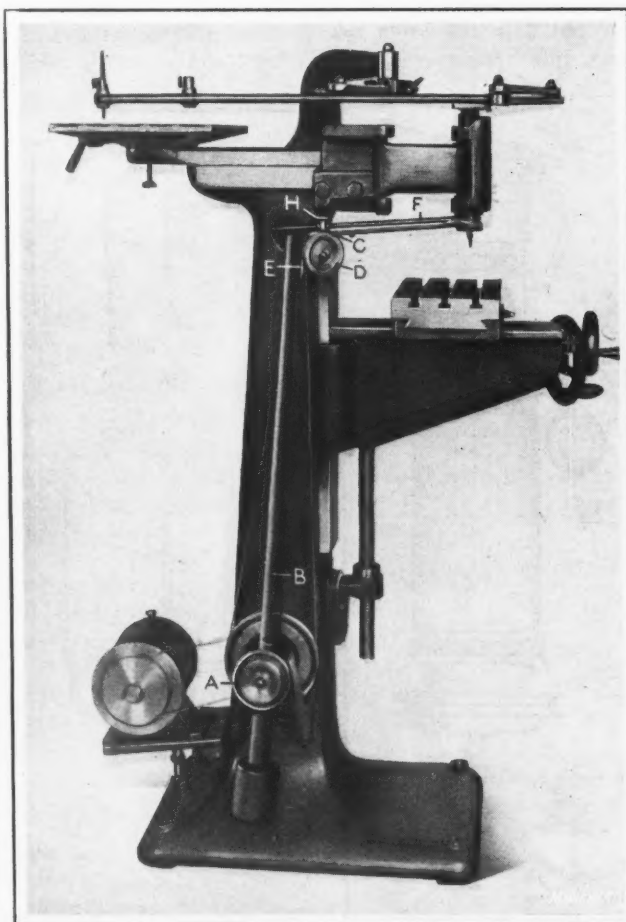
View showing Arrangement of Drive to Cutter-spindle
